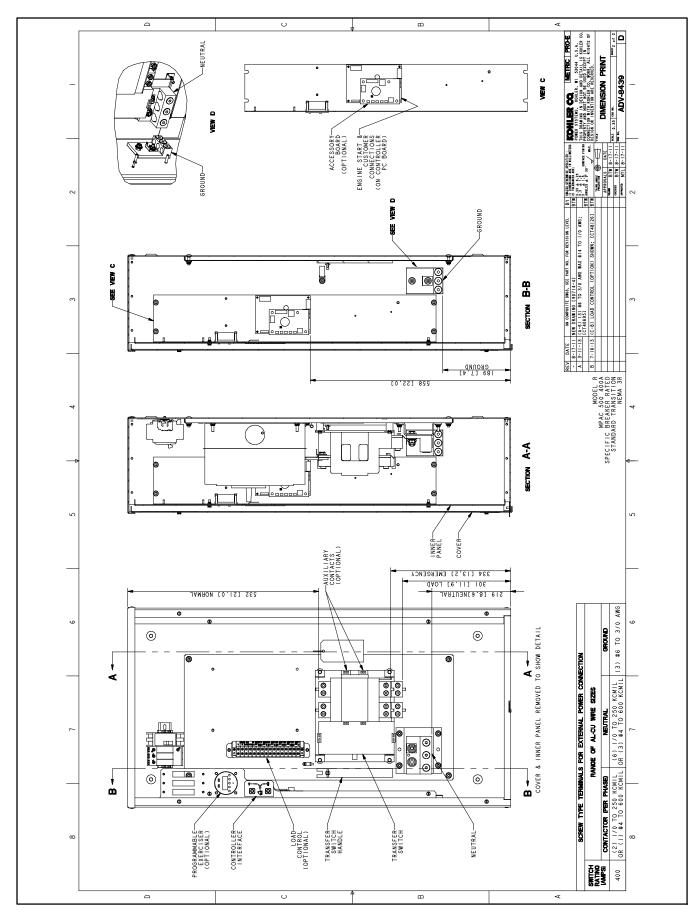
Dimension Drawing, 400 Amp NEMA Type 1 and 3R Enclosure, ADV-8439, Sheet 2 of 2
